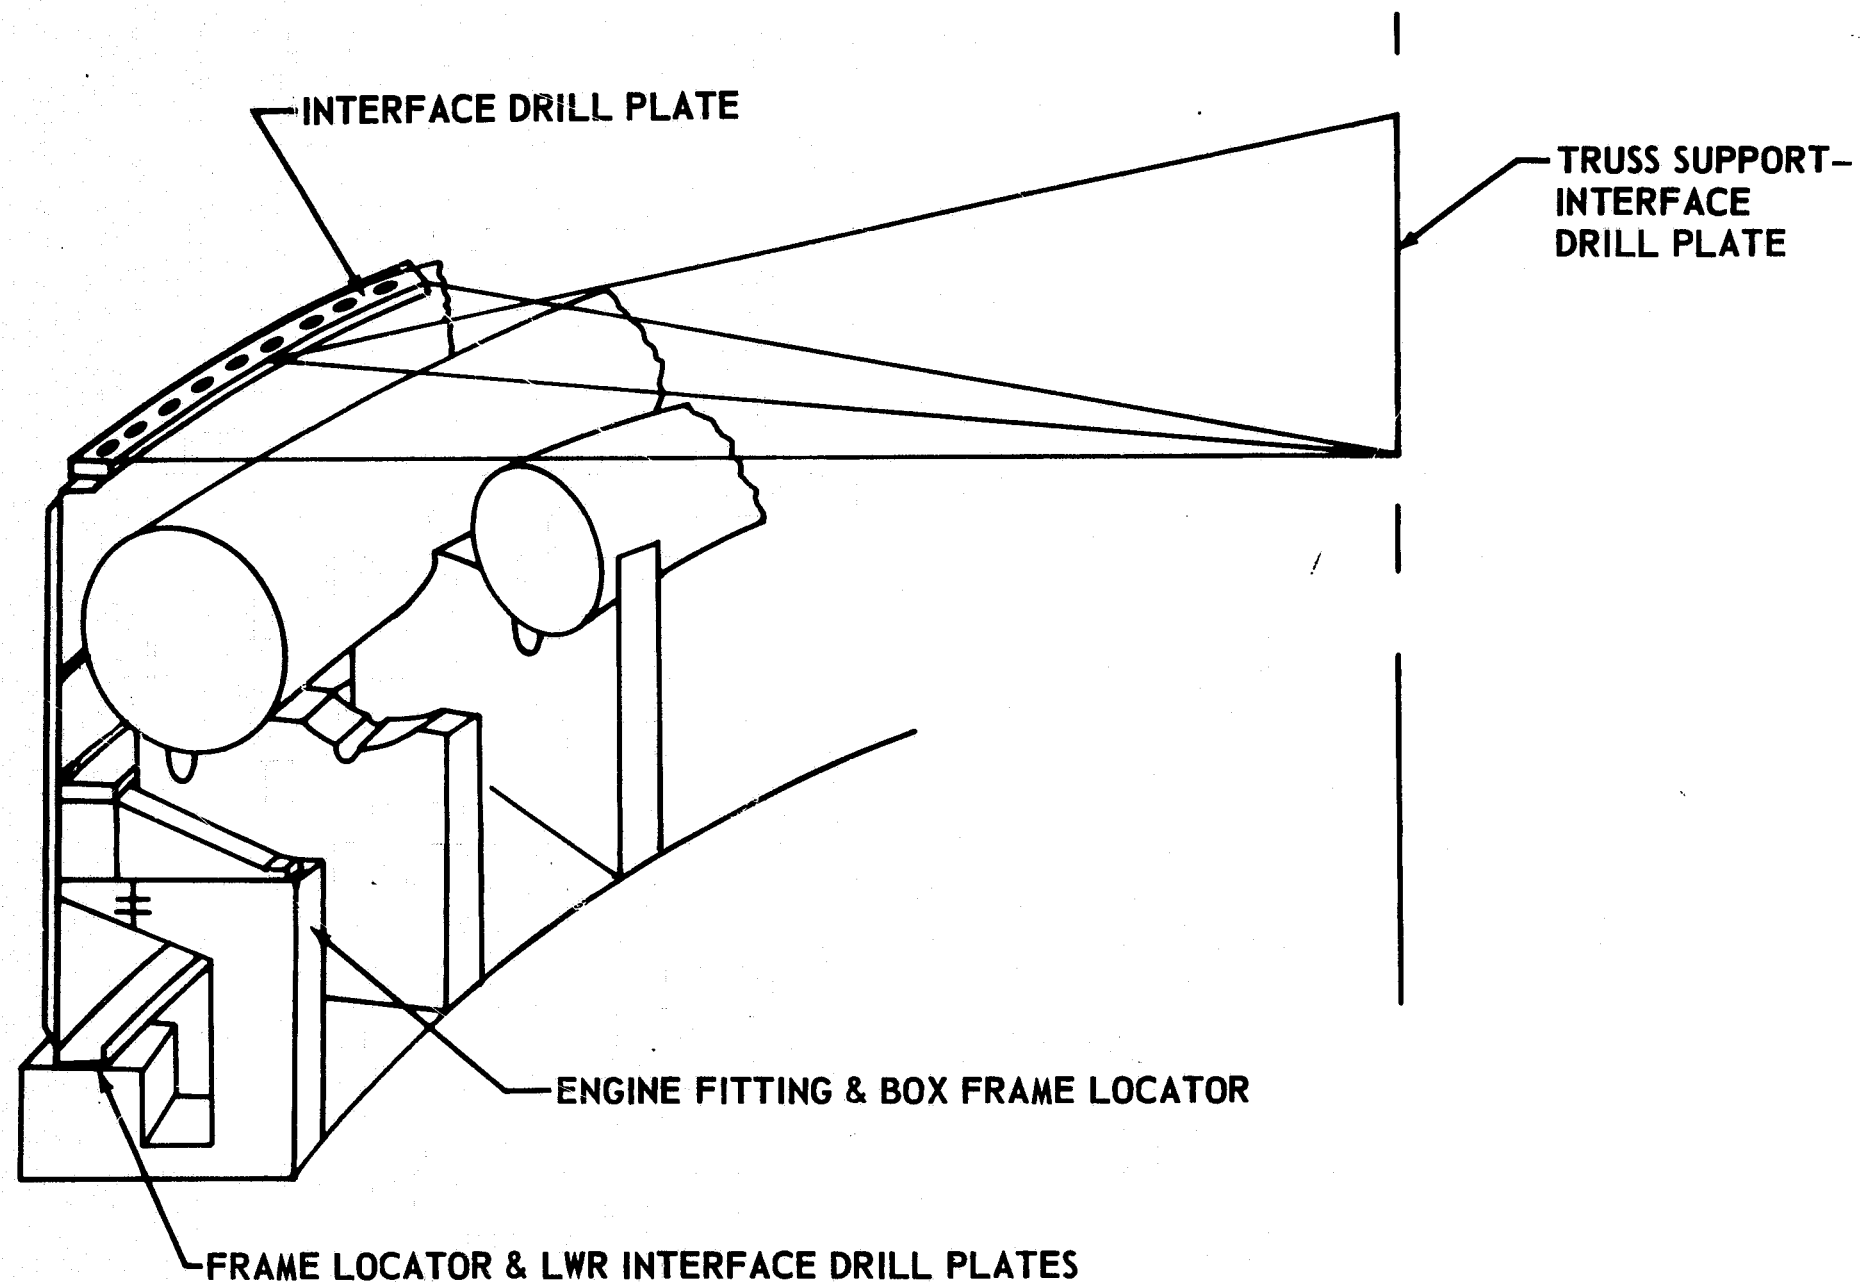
FINAL ASSEMBLY FIXTURE
